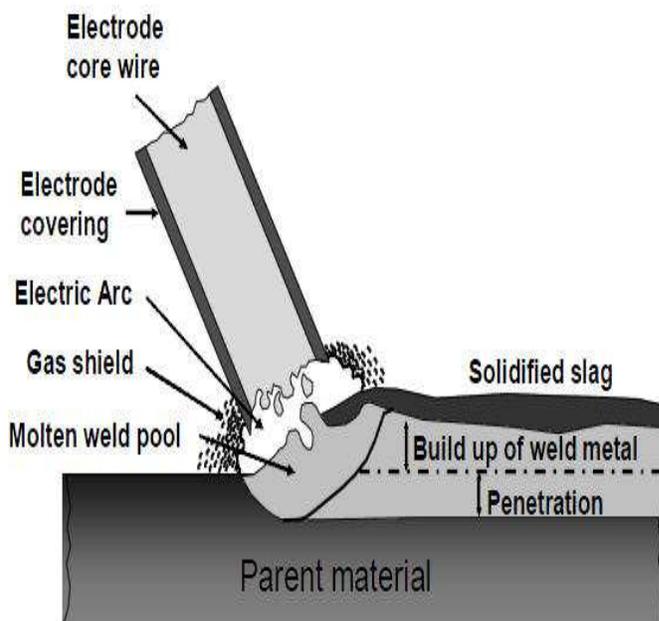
(a). Manual Metal Arc Welding (MMAW) Process
